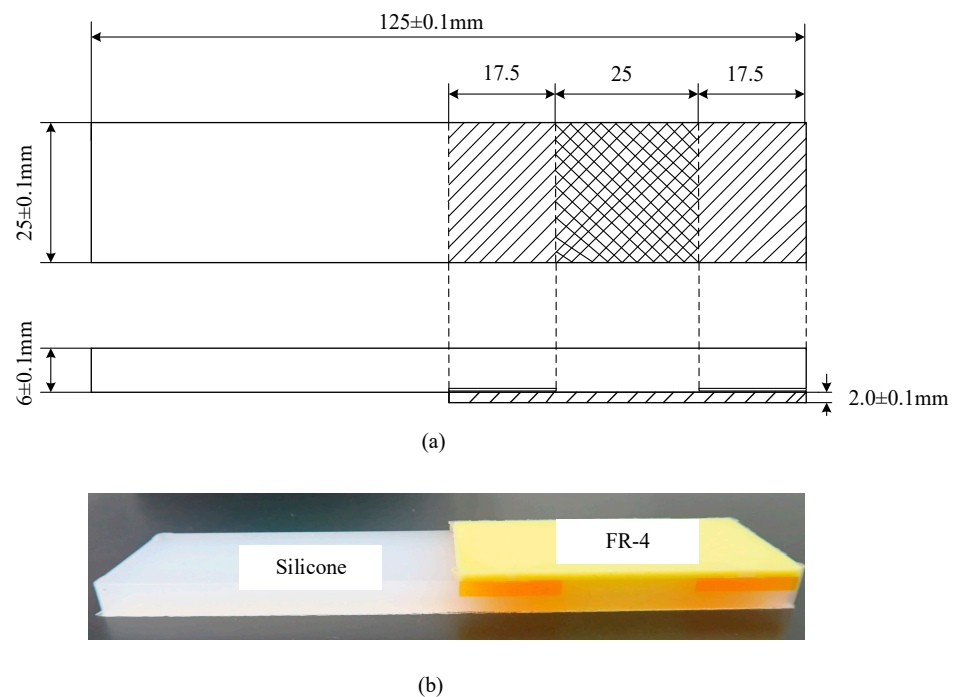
Interface bonding sample, (a) dimensional drawings of the peeled sample, (b) sample of interface bonding.
